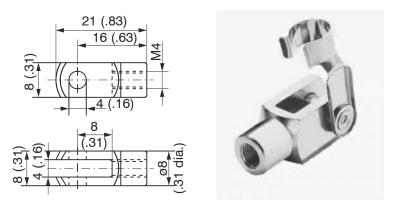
Attachment head GK1, dimensions in mm (inches), not to scale
